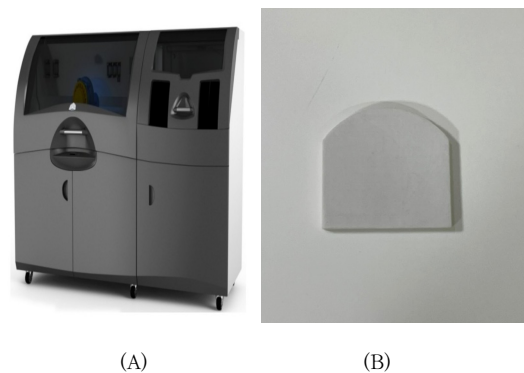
Shielding sheet made by 3D printer. (A); 3D printer, (B); 3D printed shielding sheet.
